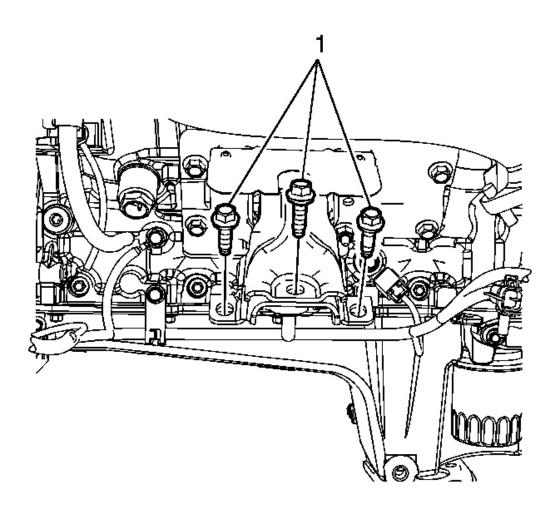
Engine Mount Replacement - Left Side Courtesy of GENERAL MOTORS CORP.
